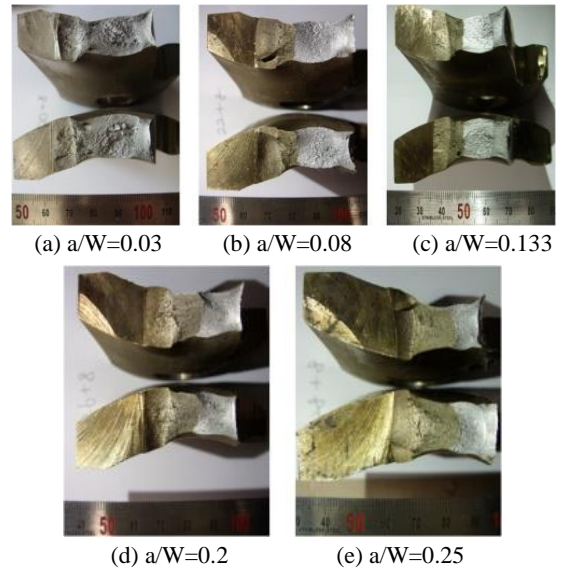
Fractured ESG specimens after fracture resistance tests according to  $a/W$
